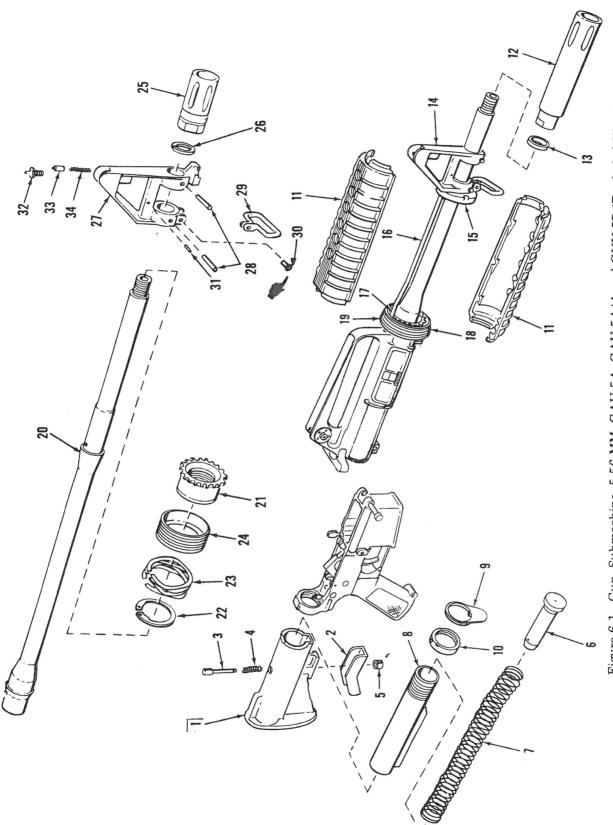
Gun, Submachine, 5.56-MM, GAU-5A, GAU-5A/A and GUU-5P (Exploded View).
